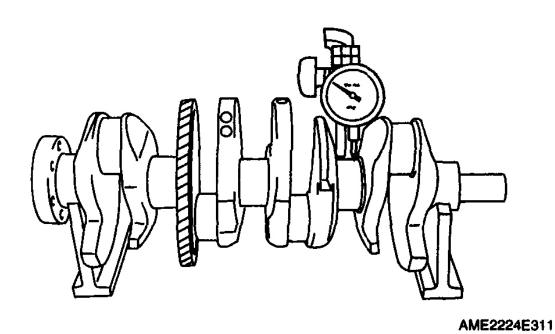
Measuring Crankshaft Runout Courtesy of MAZDA MOTORS CORP.
